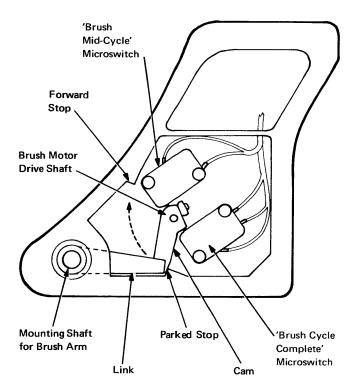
Disk Cleaning Brushes Linkage Mechanism [07475]
